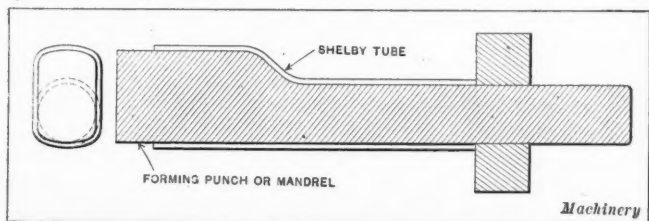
Shelby Steel Tubing with Bulging Mandrel in Place
